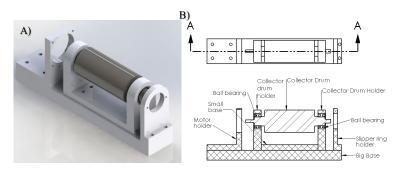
A) Full 3D design of rotating drum setup B) Partial view of rotating drum
